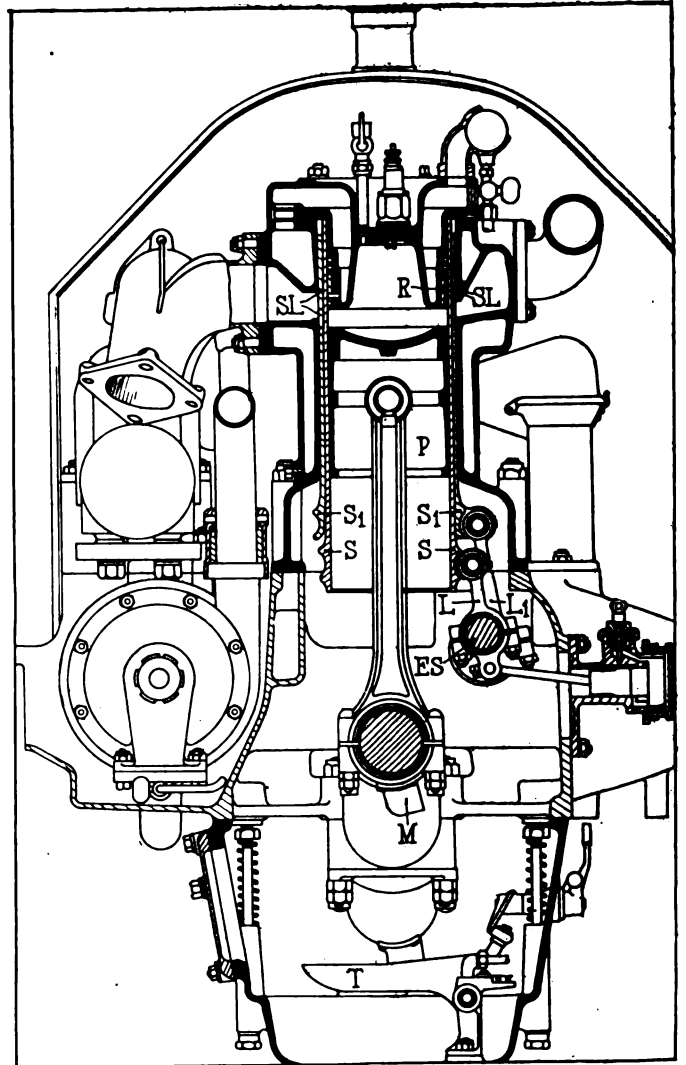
Cross-sectional view of Stearns-Knight motor, illustrating sleeve construction and design of oiling system
